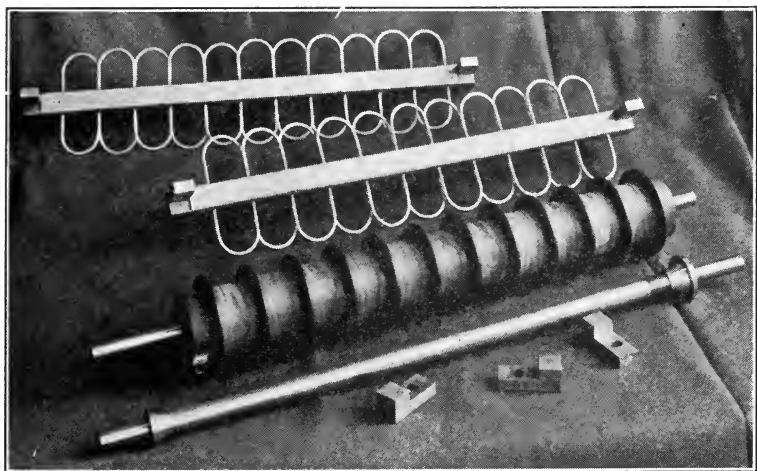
Inconel spindle and spacers for film rolls in continuous developing equipment.
